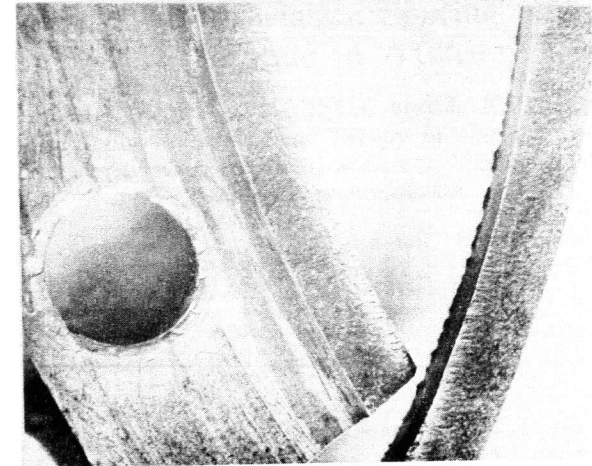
Fatigue by 'Ignorance' defeating all the engineering ingenuities through premature cracking of the steel flange radius of an engine cylinder. X 3
